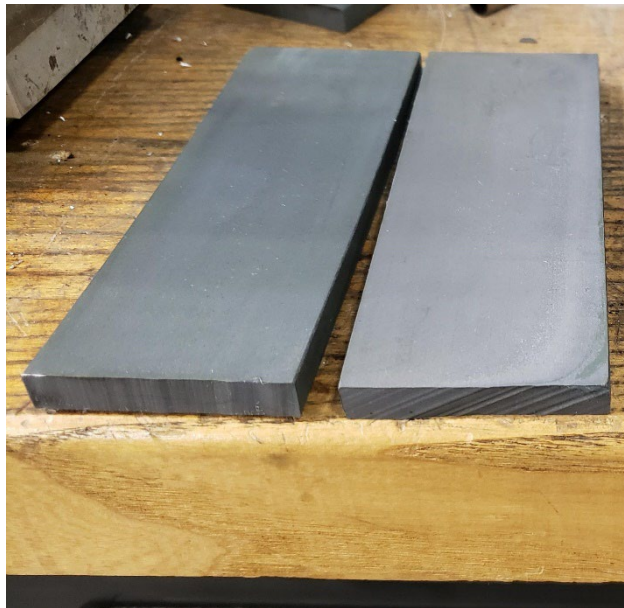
Heat-treated plates of Haynes®282® for welding trials (designated as #1 and #2).
